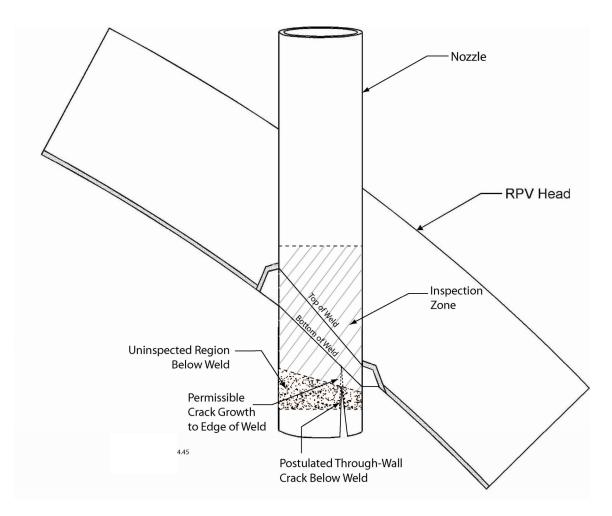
Axial Flaw Assumption for Uninspected Region below J-Groove Weld (Tensile Stress to Bottom of Nozzle)
